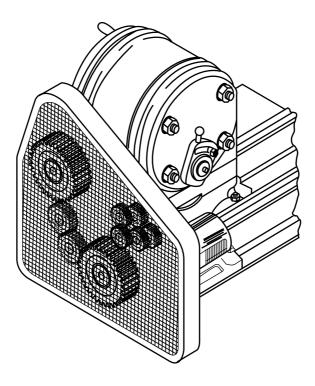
EXAMPLE OF AN ENCLOSING GUARD TOTALLY PREVENTING ACCESS TO TRANSMISSION MACHINERY
